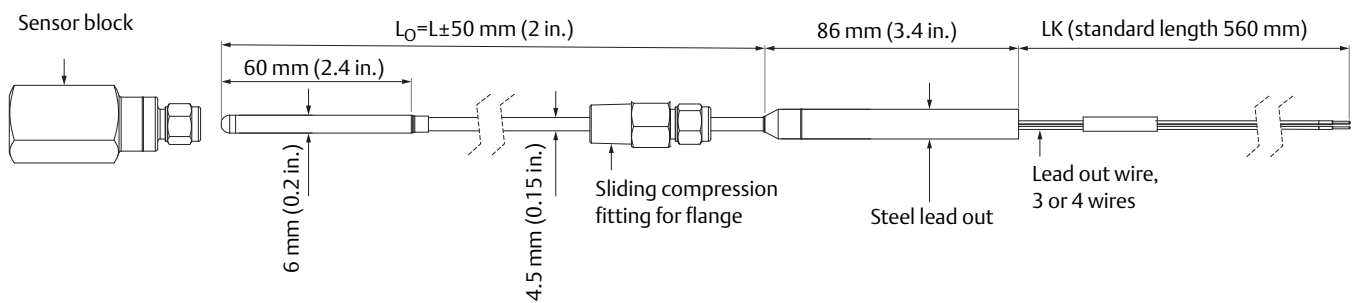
Rosemount 614 Cryogenic Spot Temperature Sensor with Cable Lead Out and Fixed Flange Fitting
